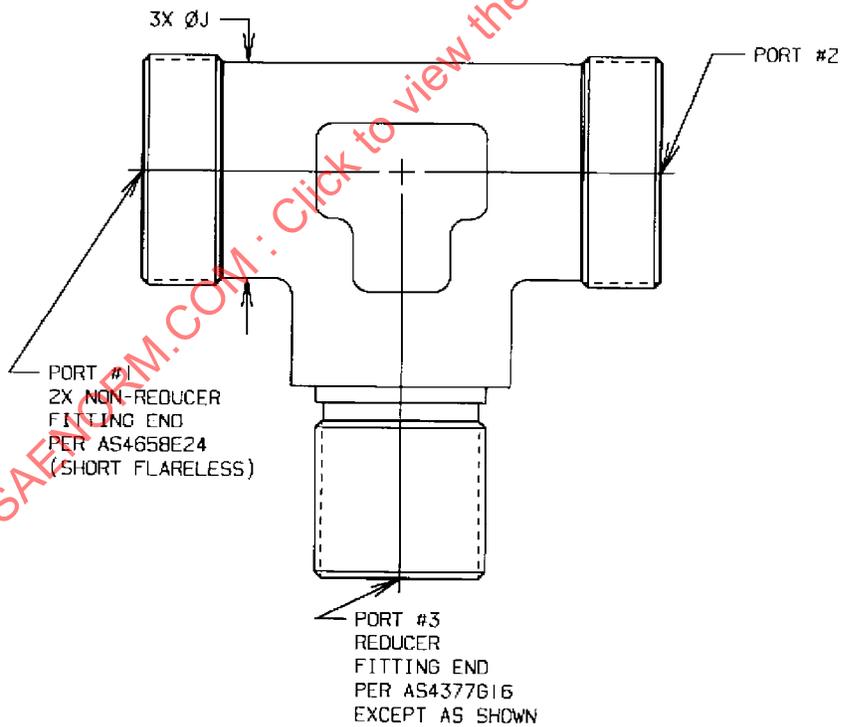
D - FITTING, TEE, SIZE 24 SHORT ENDS TO SIZE 16 BULKHEAD REDUCER
